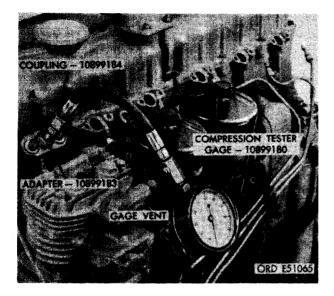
CHECKING CYLINDER COM-PRESSION USING COMPRESSION TESTER GAGE -10899180, COUPLING -10899184, AND ADAPTER - 10899183.
